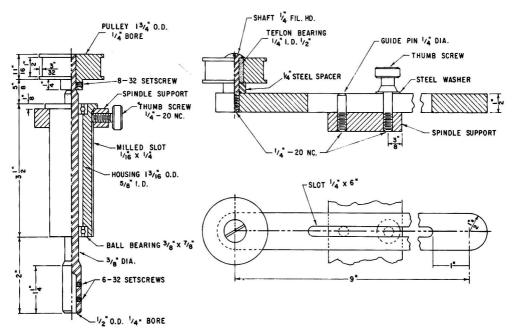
Diagrams of the spindle and belt tensioner assemblies.
